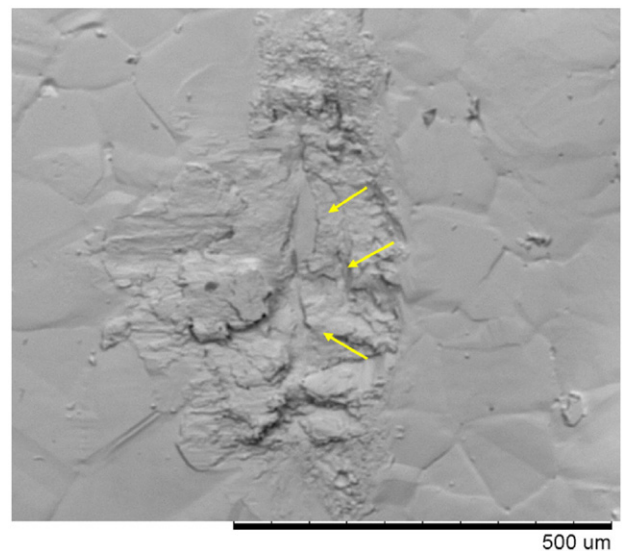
Fracture surface of bond sheared area in the as-bonded condition.
